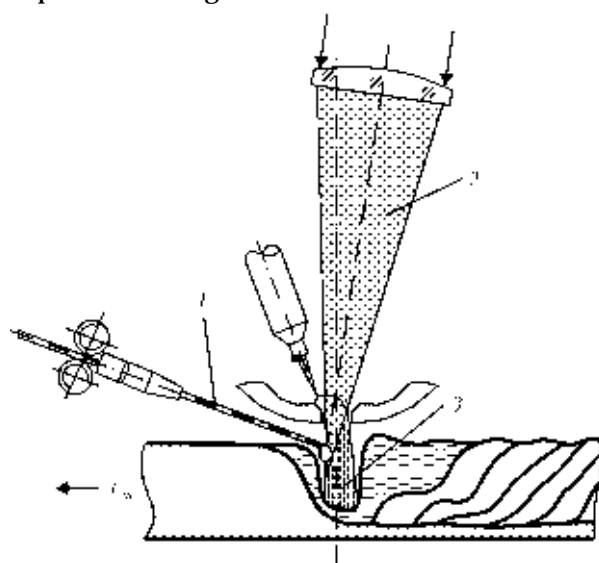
Scheme of experimental arrangement for hybrid laser-plasma welding by integrated plasma torch: 1 — filler wire; 2 — laser beam; 3 — plasma arc
